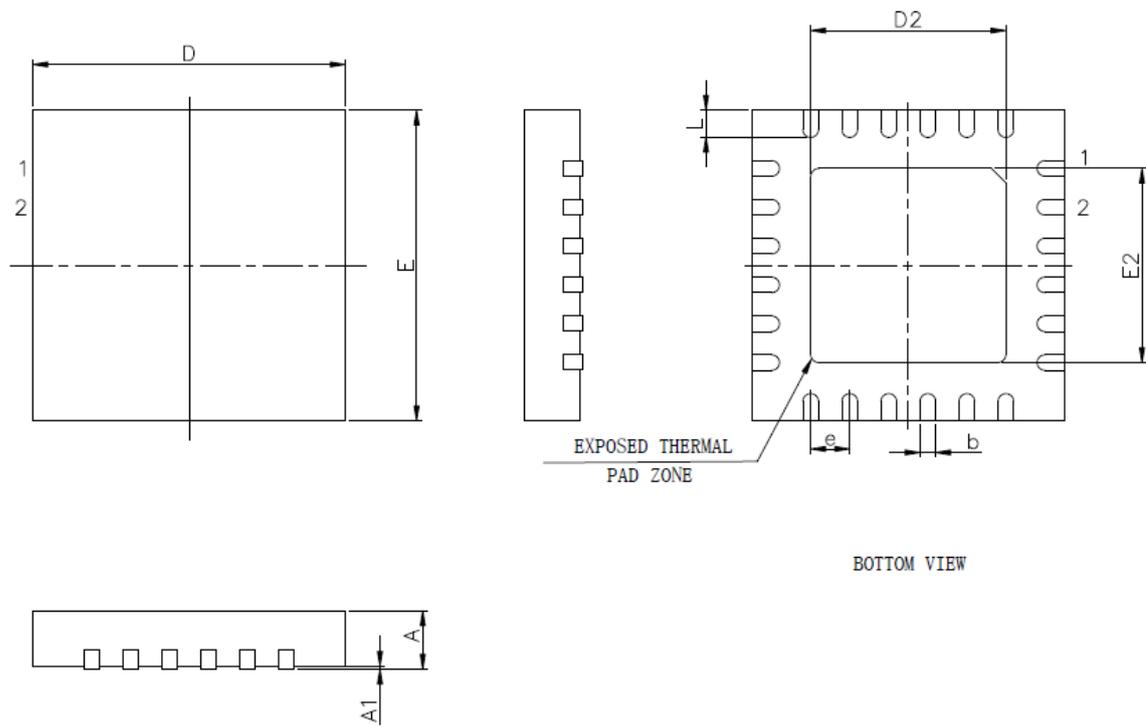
Package Drawings of EU5821Q QFN24_4x4
